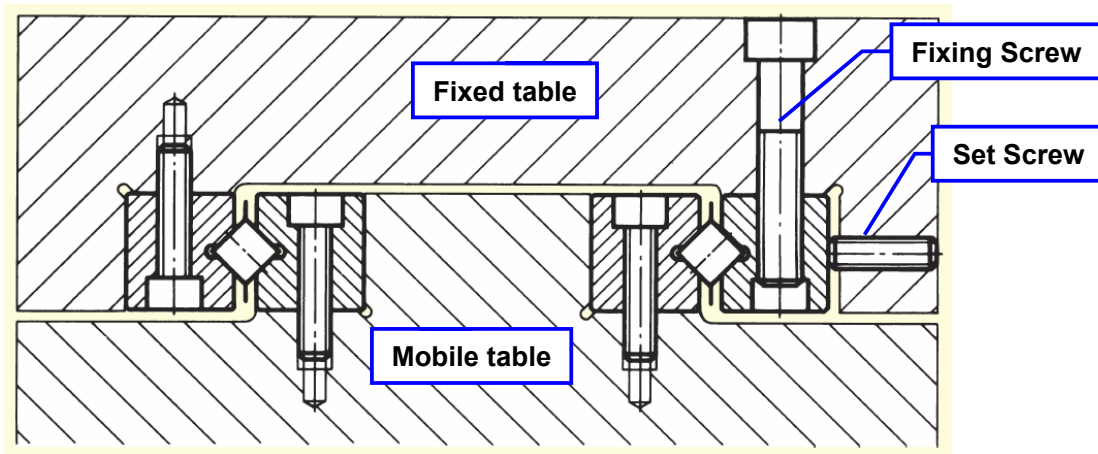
Linear bearing assembly mounting scheme (Source Schneeberger)
